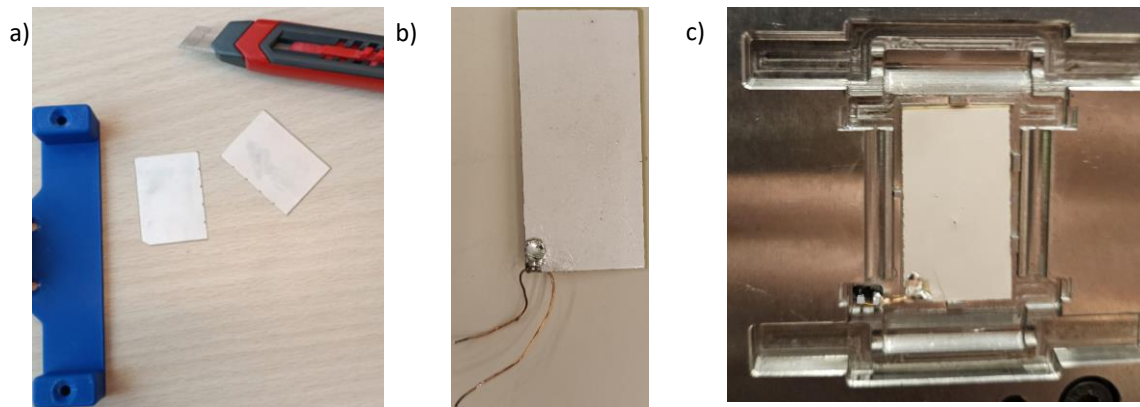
a) cutting process with a razor, b) piezo with the wires soldered, c) piezo positioned on the mould with the wires and connector soldered to it
